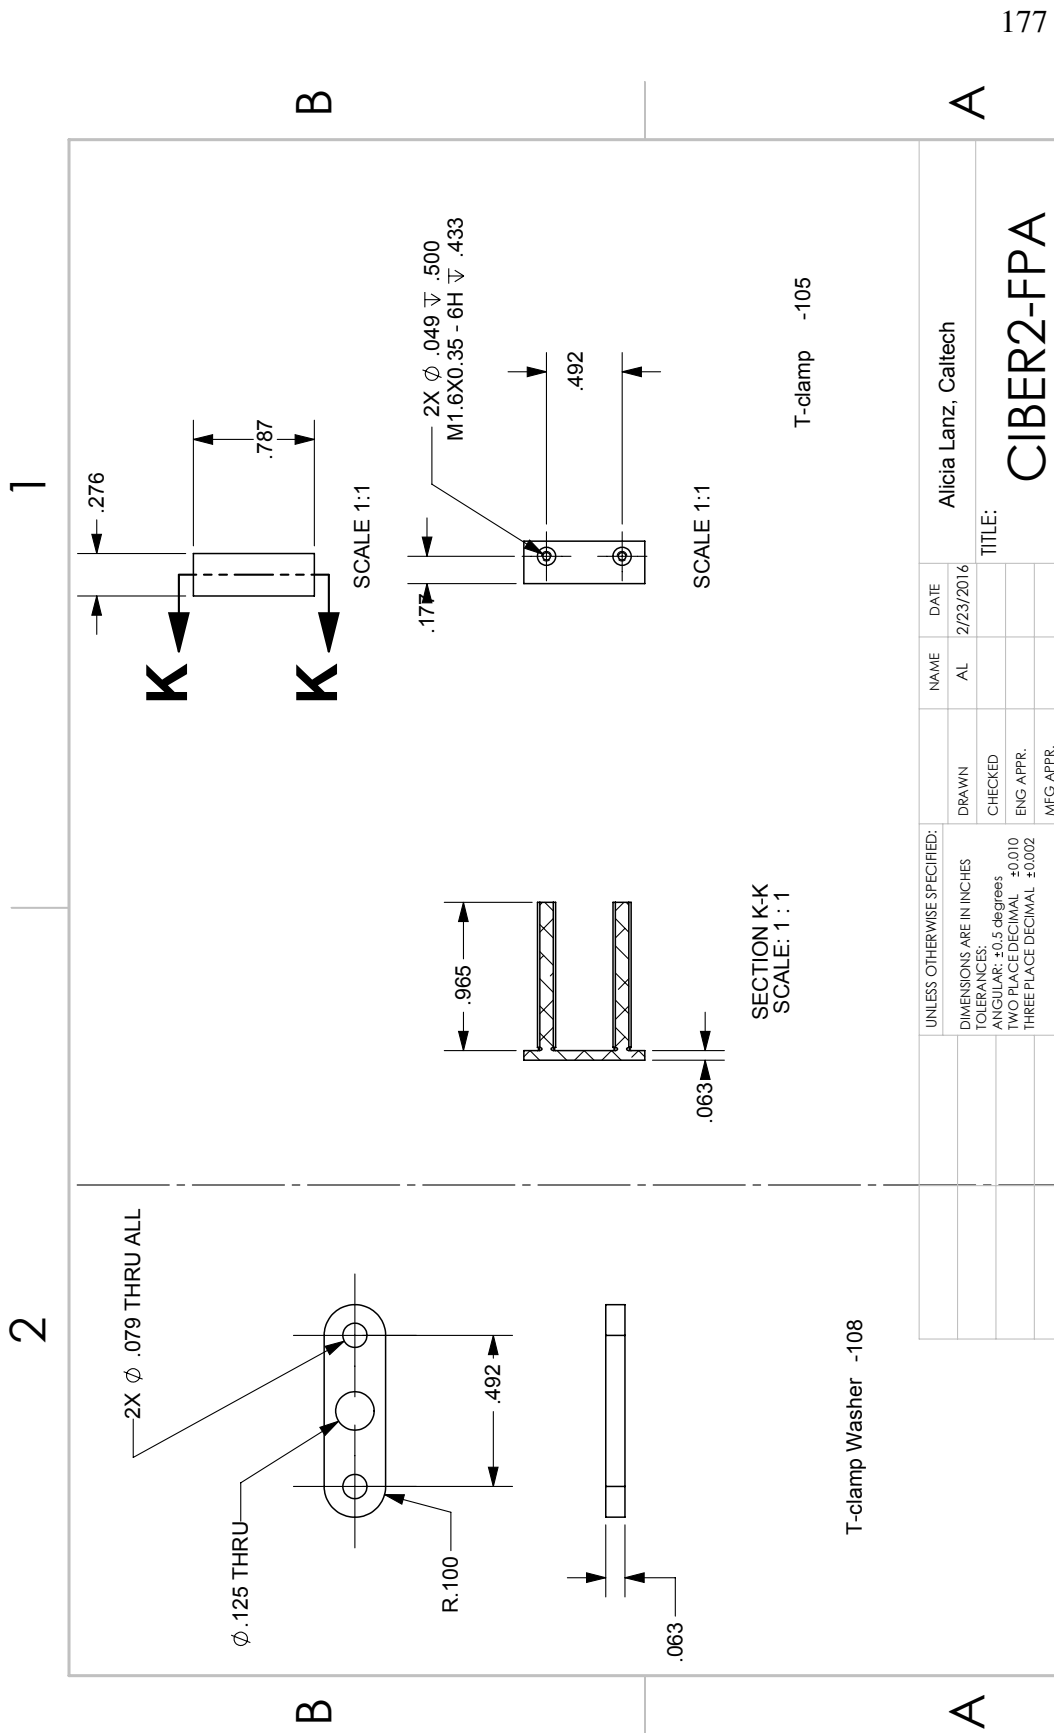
Mechanical drawing for flight version of the CIBER-2 focal plane assembly filter spring clip and T-washer.
